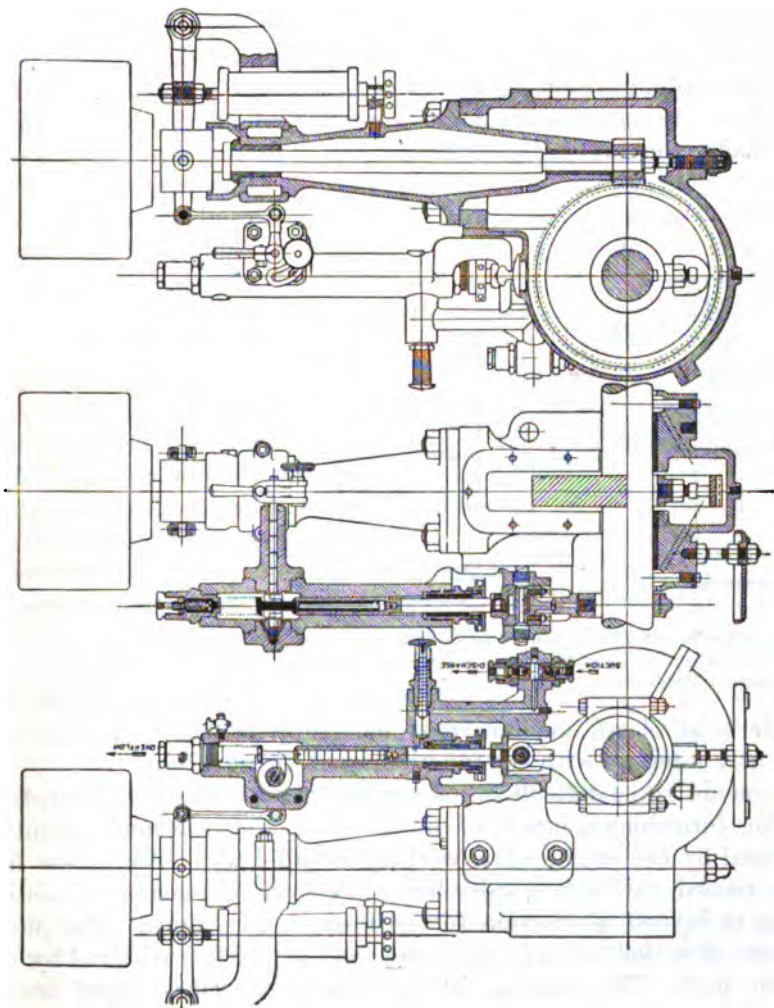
Cross section of oil pump designed to supply oil to open nozzle.
